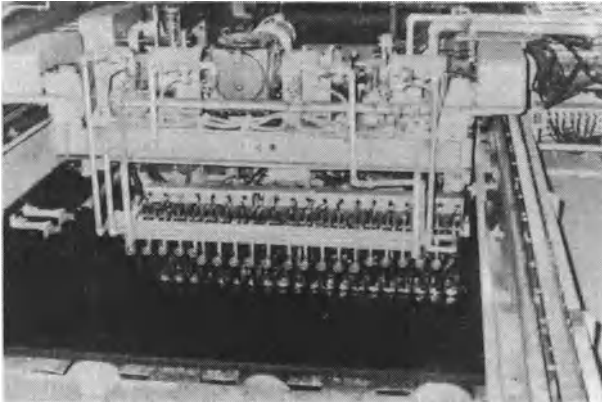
Test installation for heavy plate up to 80 mm thick using TR probes from above (design Mitsubishi Electric Corp., courtesy of Nippon Kokan Corp., Japan)
